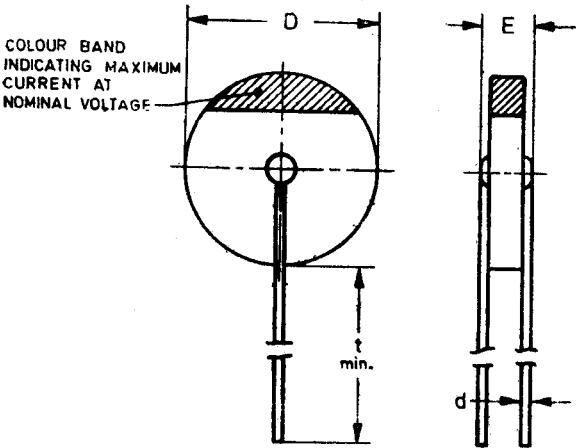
OUTLINE DRAWING AND DIMENSIONS
